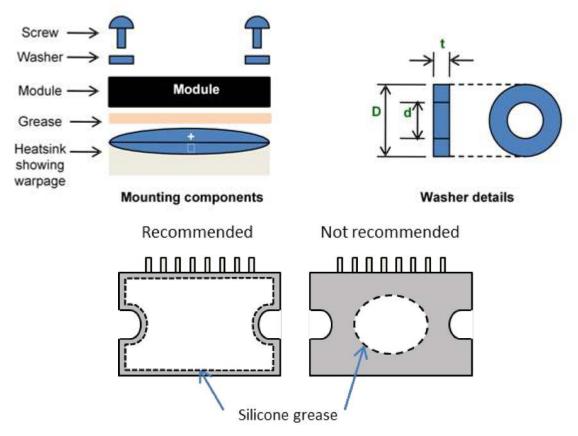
Module Mounting Details: Components; Washer Drawing; Need for Even Spreading of Thermal Grease
